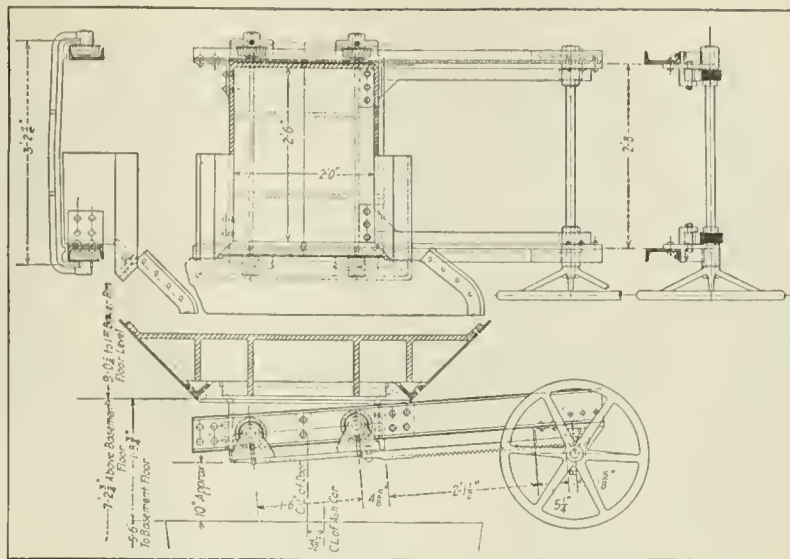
ASSEMBLY OF ASHPIT DOOR AND FRAME
